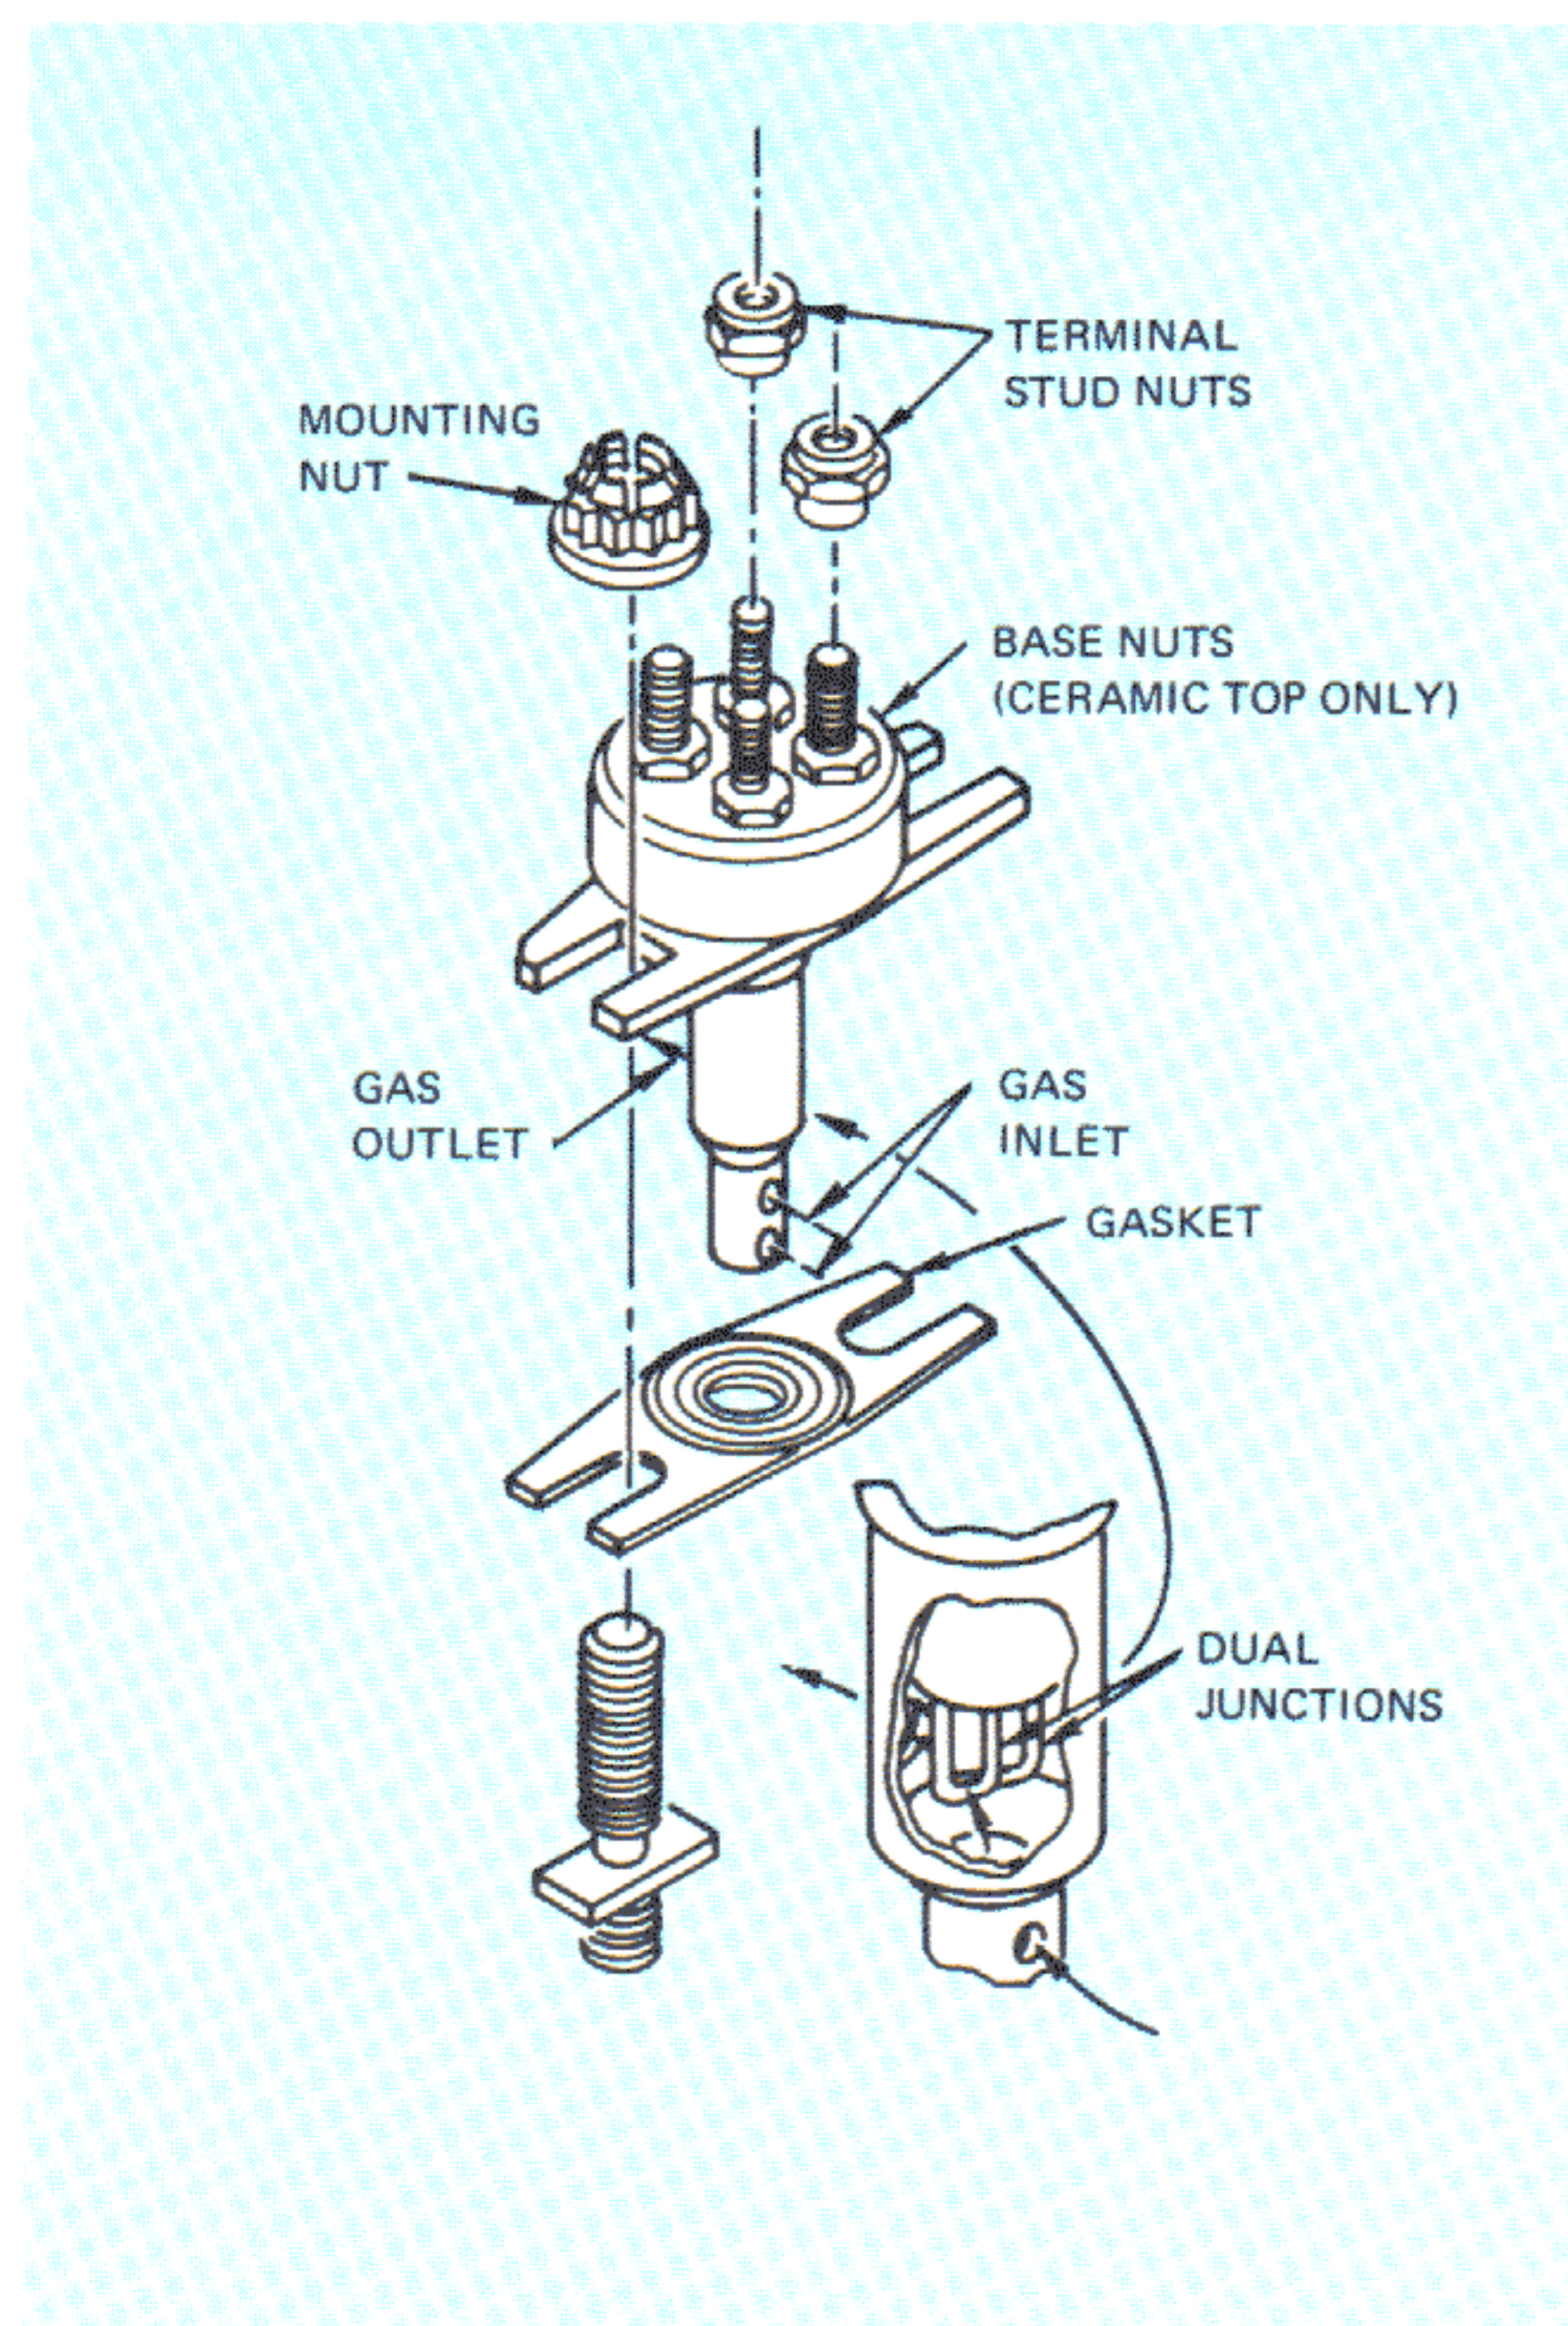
Exploded View of T56-A-10WA Engine Thermocouple and Attaching Parts
